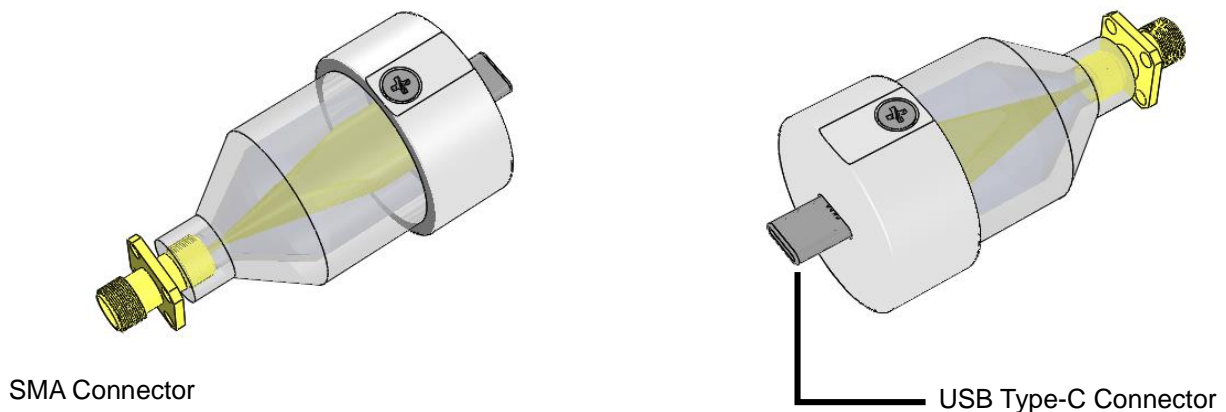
USB Type-C RFI System Level Test Fixture (MEU-27P11-053)
